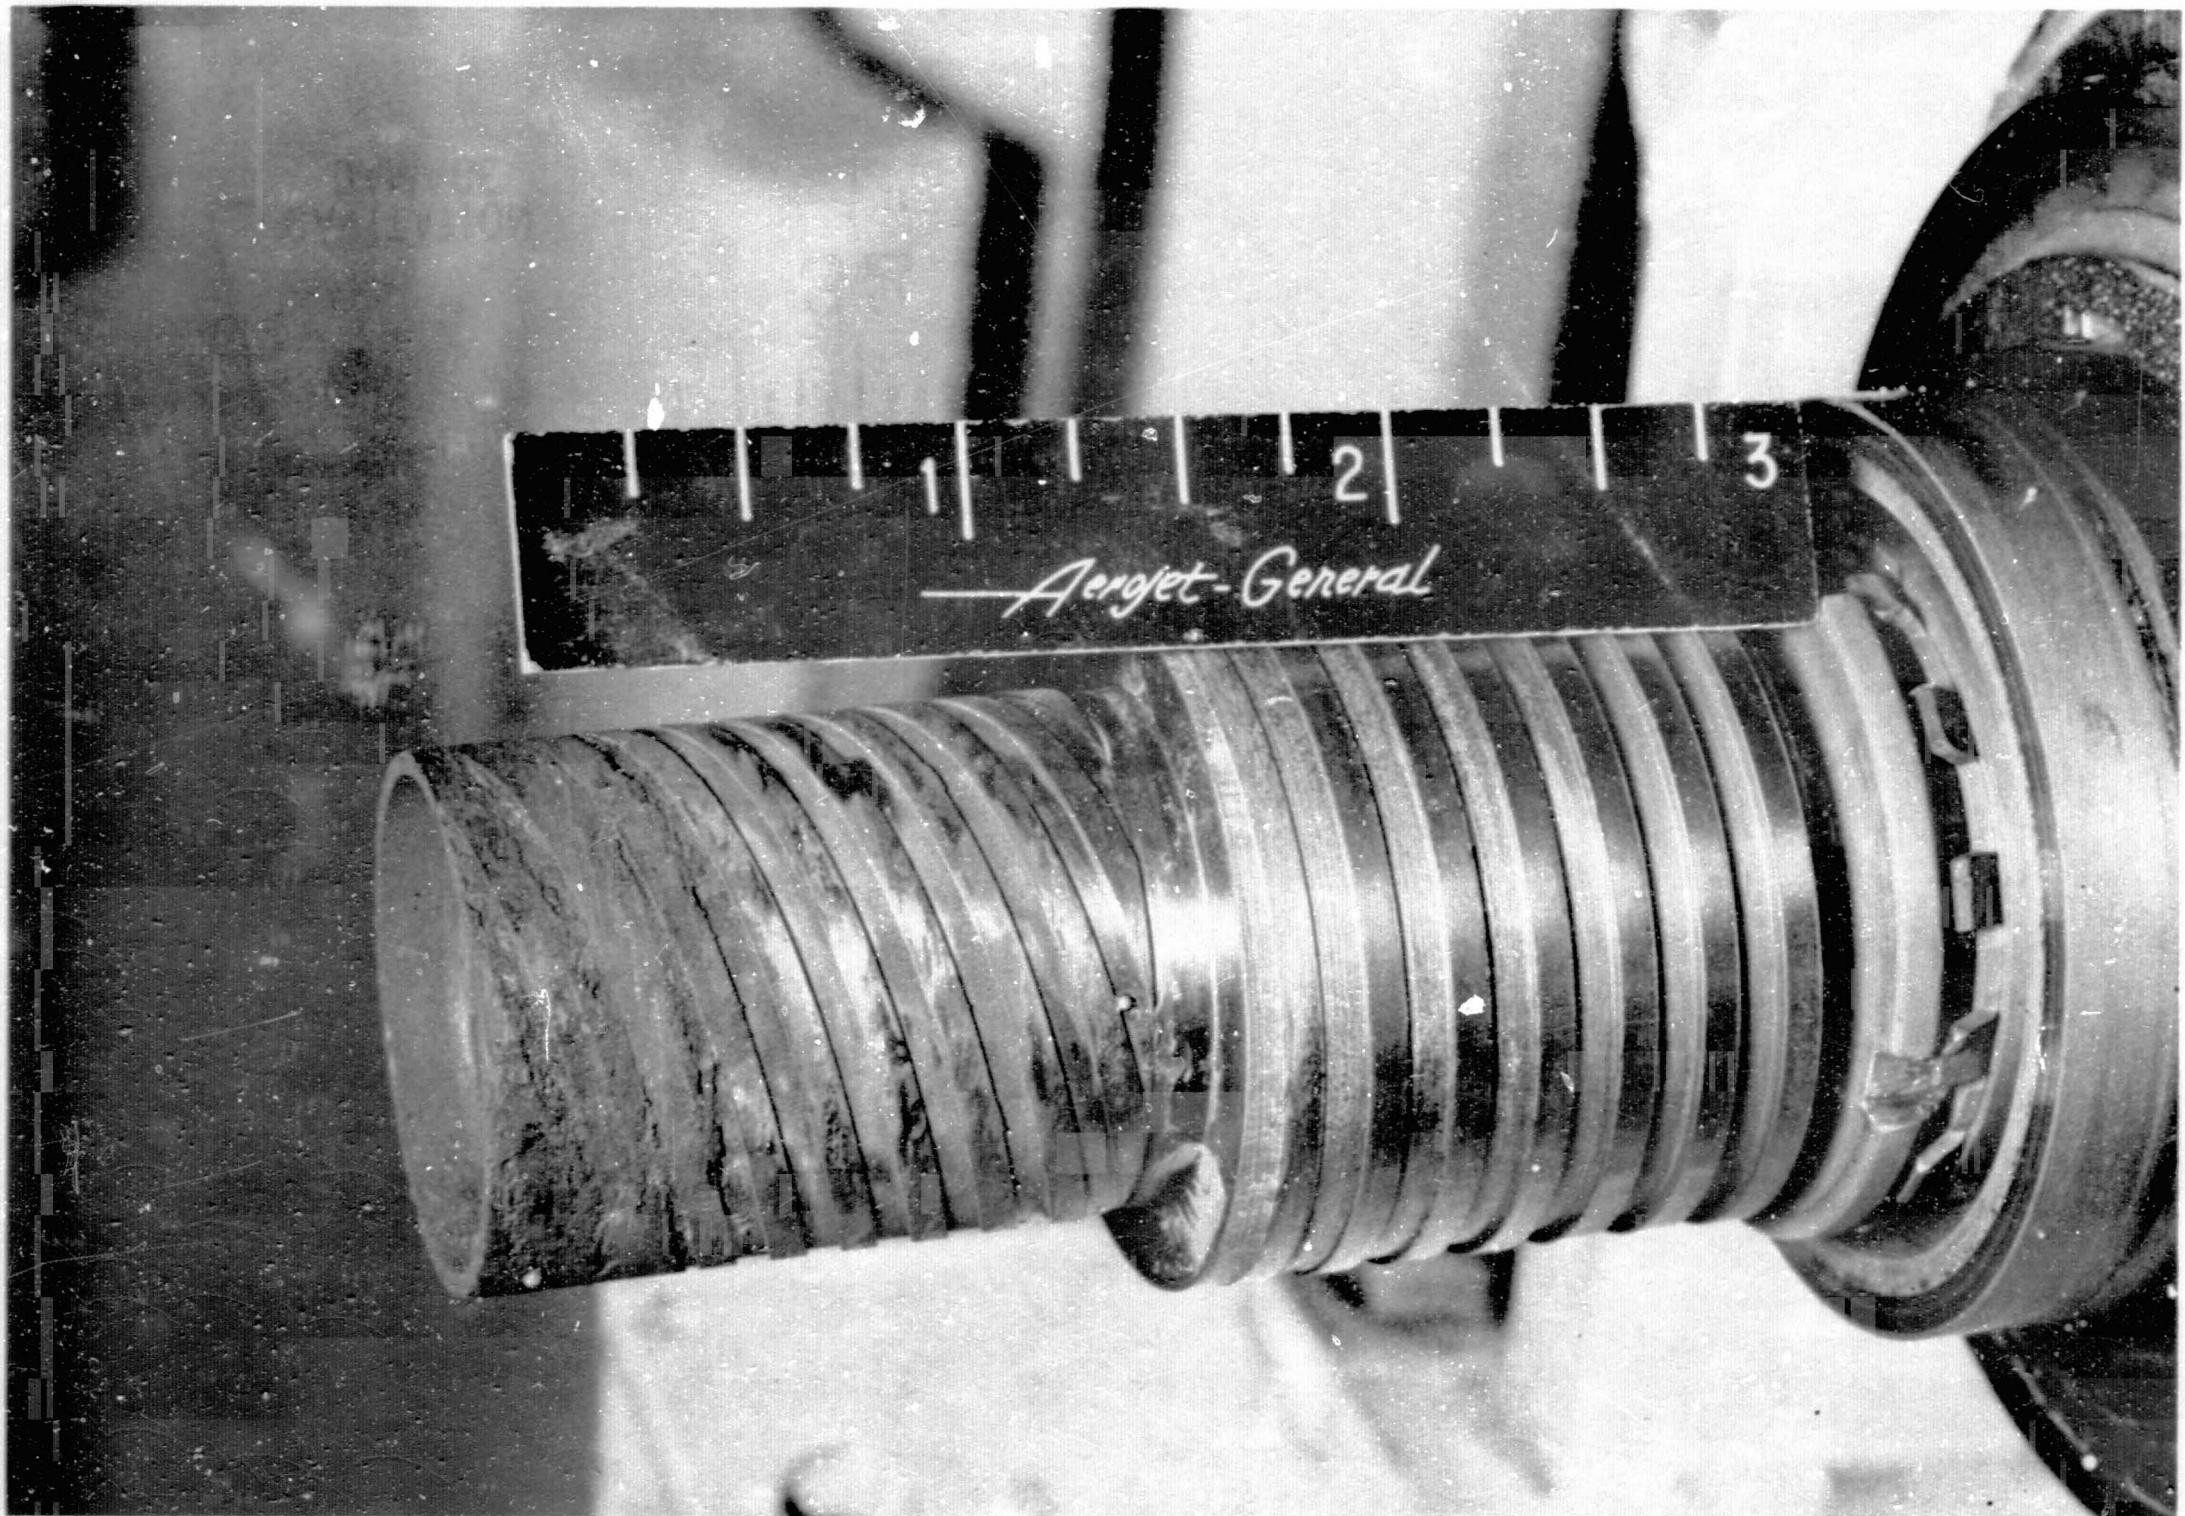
Visco Pump Sleeve Showing Filled Grooves at Disassembly
